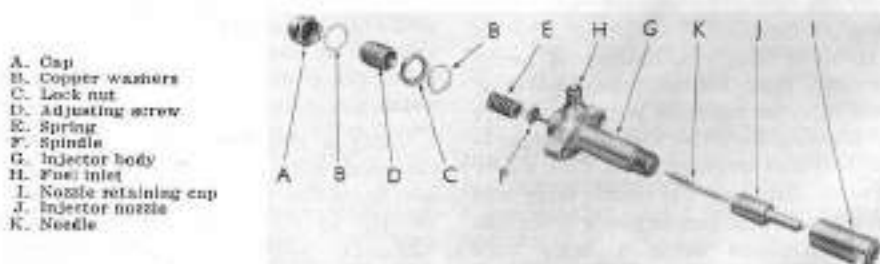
Exploded view of typical fuel injector assembly. Refer to Fig. 66 for cross-sectional view.
